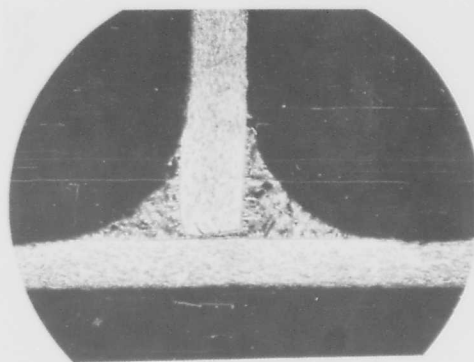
T-ZM Brazed Joint After Test at 2950° F (75X)
